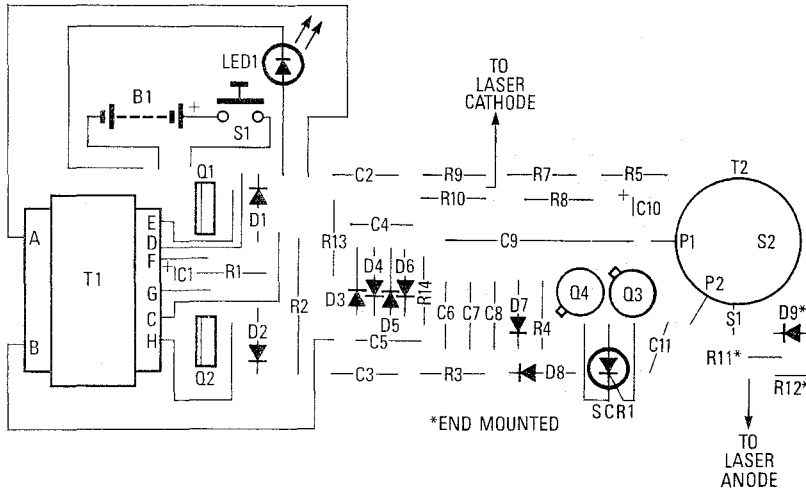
IF YOU CHOOSE to use the PC board provided in our PC Service section, use this parts-placement diagram.
